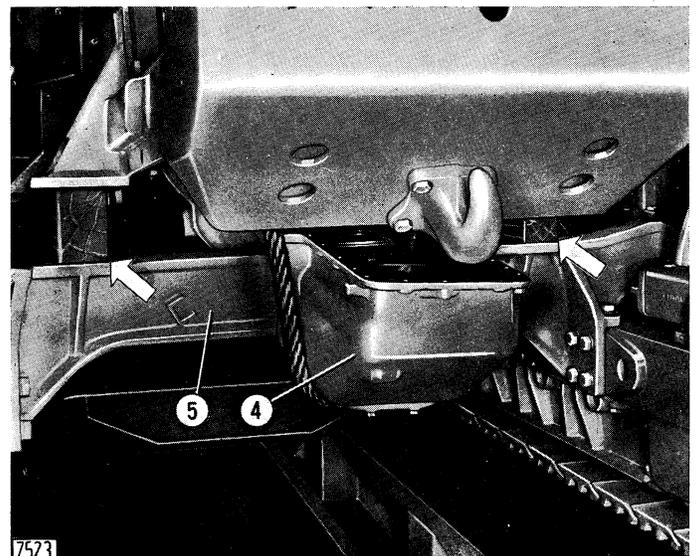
Removing (or Refitting) the Oil Sump with the Engine in Position on the Machine
